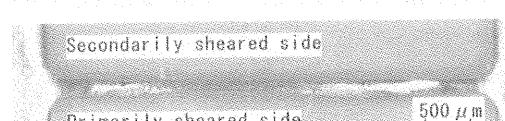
Improved surface using combination of shaving and shearing (A1100P-H24, Clearance:15%, Wx:500 μm, Wy:0)
